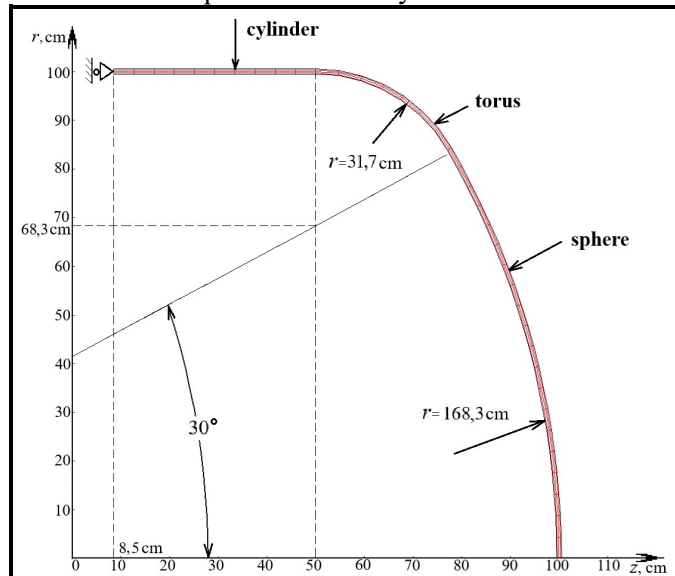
Axisymmetric design diagram of half of a welded vessel workpiece
